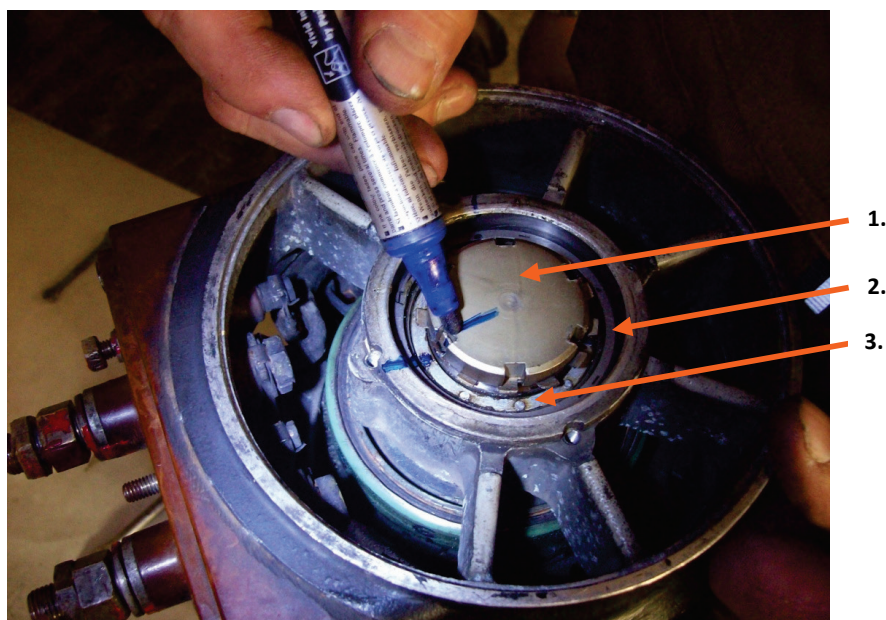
Applying the inspection mark to the inner ring and the cage of an aircraft generator rolling bearing: 1 – bearing journal, 2 – immobile bearing race, 3 – bearing cage
